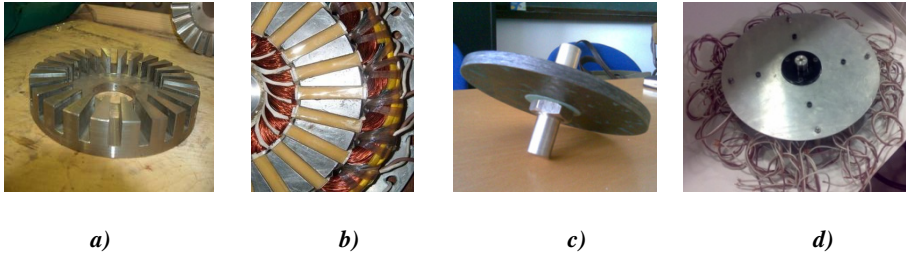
Built motor: *a)* steel semi-stator; *b)* double cooper layer slot stator winding, *c)* polycrystalline YBCO rotor and *d)* full motor with two semi-stators
